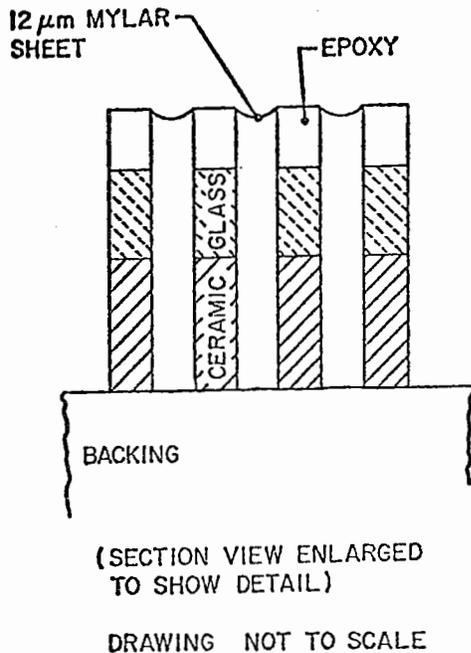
Assembly drawing of longitudinal wave transducer array.
